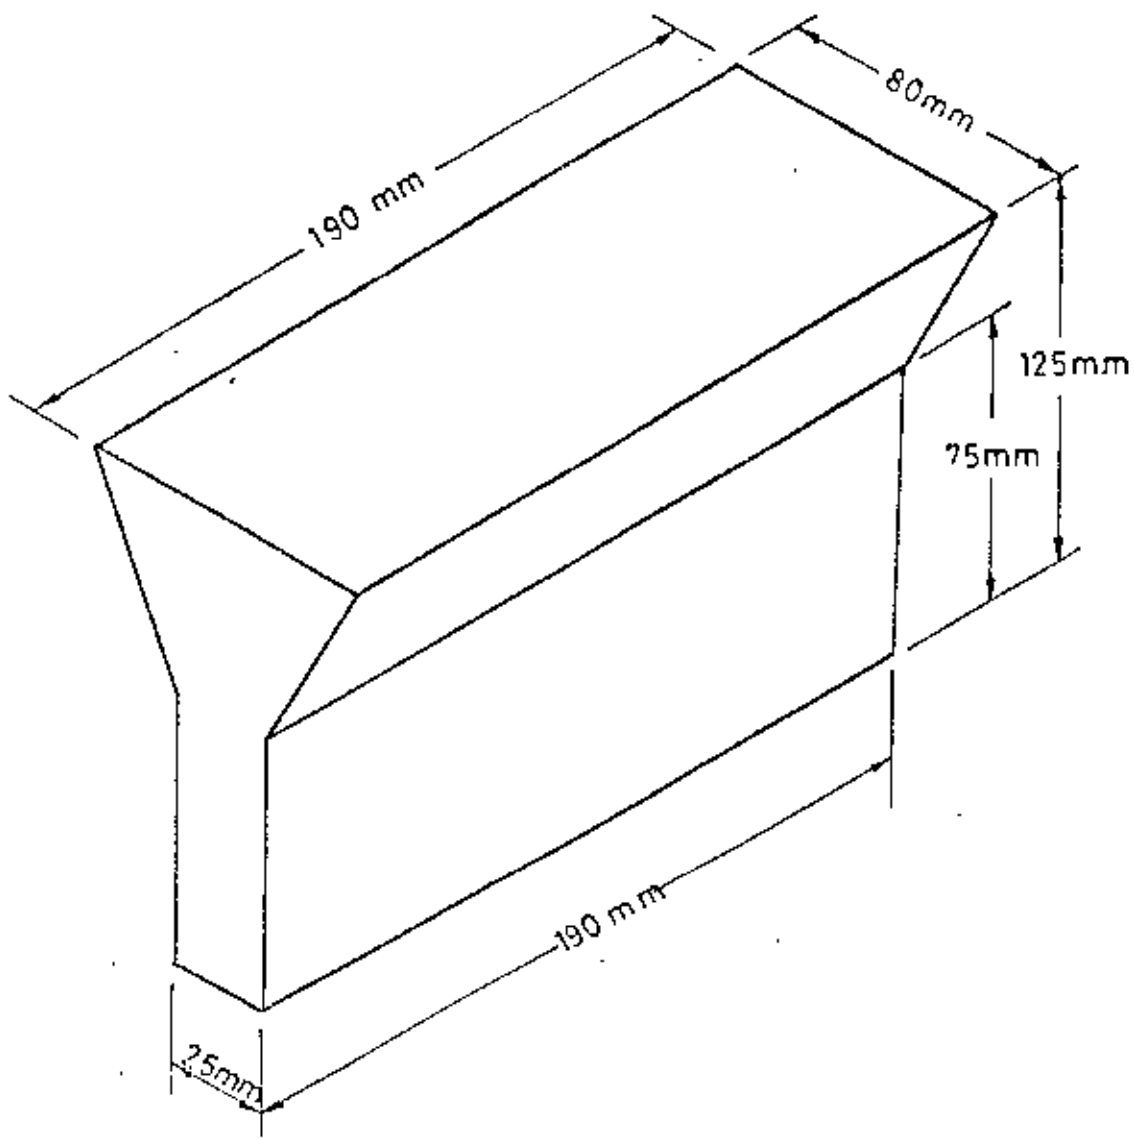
CAST IRON KEEL BLOCK MOULD.
